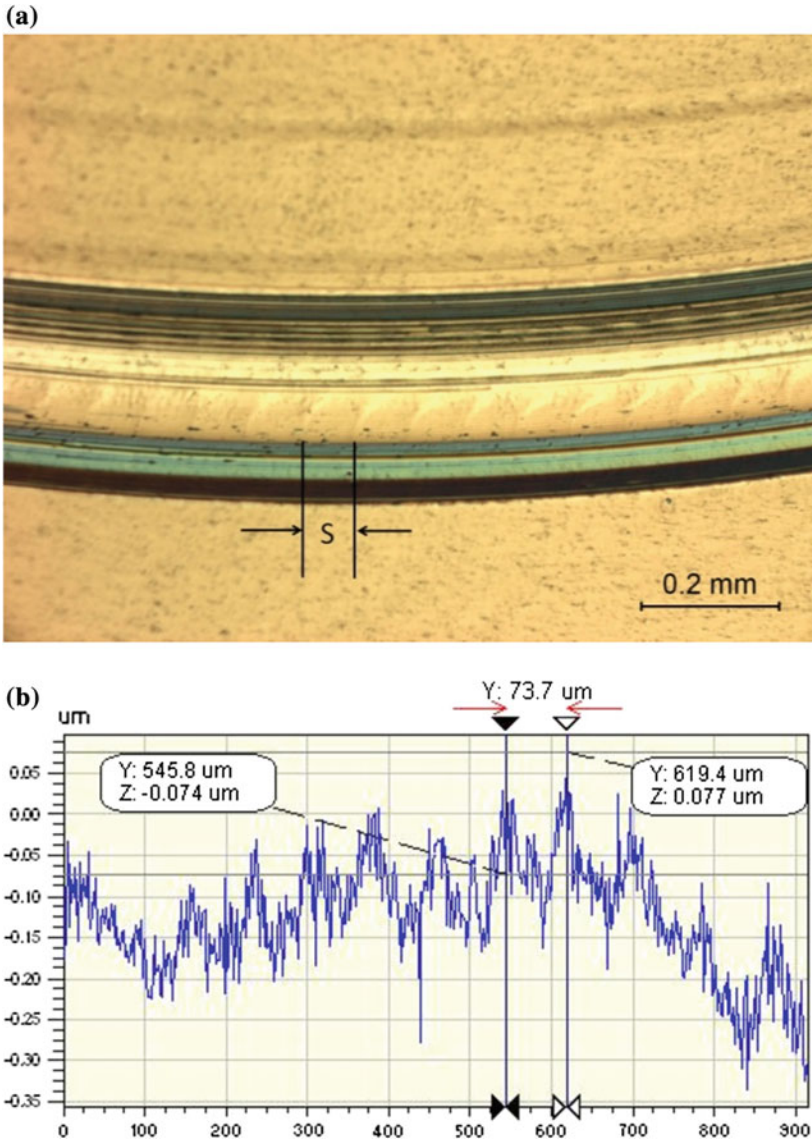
shows a photograph of the tool mark segment which was taken using an optical microscope. A series of notch-like marks lining up tangentially to the cutting direction can be observed inside the groove of the cutting marks. To calculate the frequency, or the cycle of the generation of such marks, the distance between two notch-like marks is measured with the help of the non-contact optical profiler Wyko NT8000. The average distance  $s$  is calculated to be around 73.7  $\mu\text{m}$  based on the original 2D profile data in Fig. 8.4b. The frequency ( $f_{\text{calc}}$ ) of the generation of the notch-like tool marks can be calculated by Eq. (8.6).
